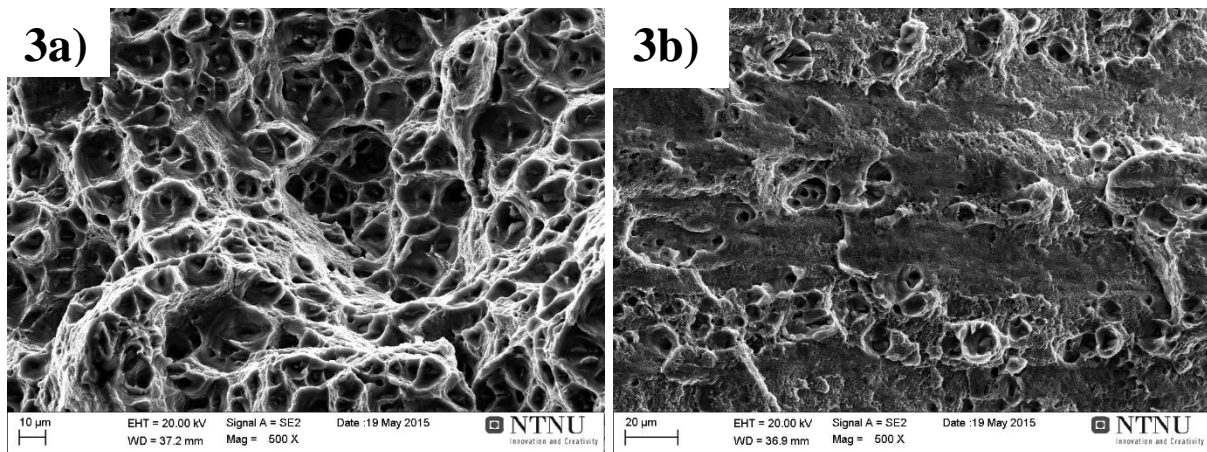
The final fracture, 500X magnification, 3a) dimples in the middle of the fractured surface, 3b) some dimples, micro shear and maybe fatigue crack propagation, at the left side of the fractured surface. This area was not further investigated.
